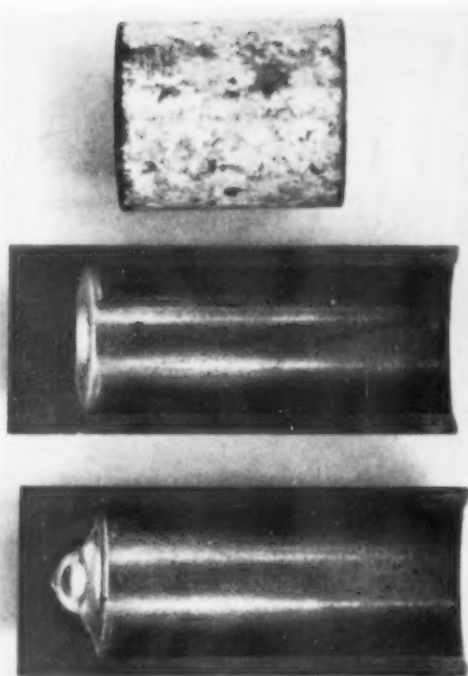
A backward extrusion with a final coin operation on base of component part
